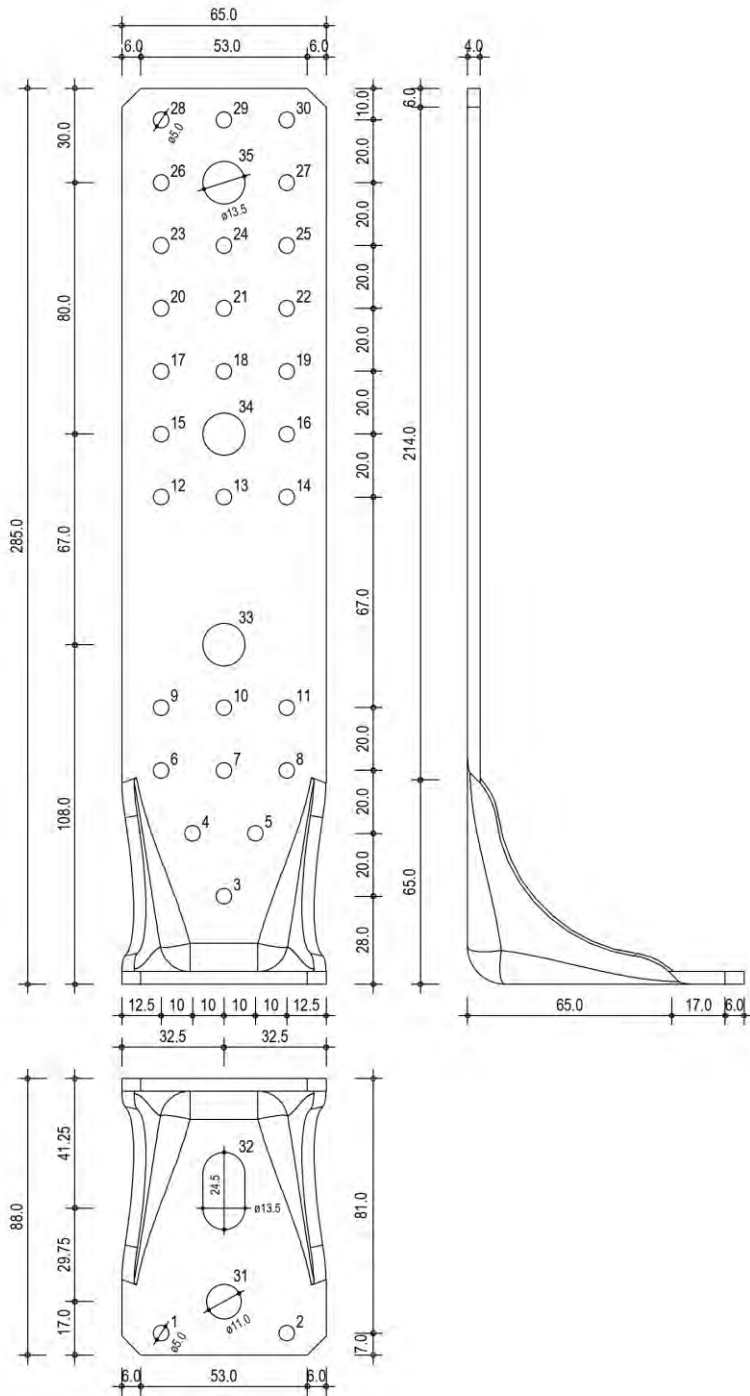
Dimensions of Angle Brackets 1102853 and 1122853
